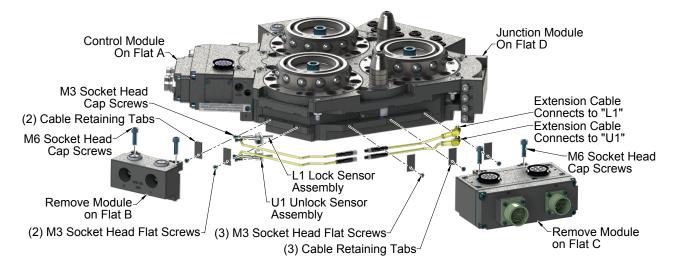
Lock and Unlock Sensor Assemblies (L1/U1) Replacement
